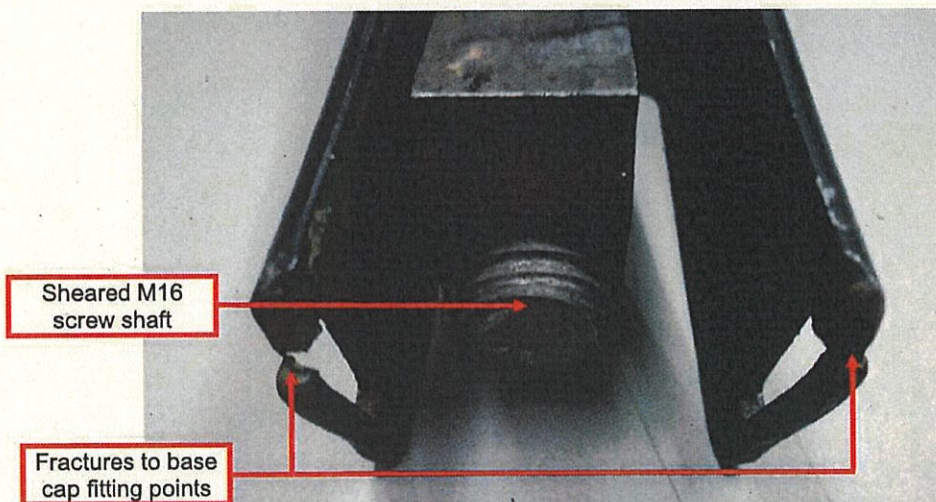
Fractures to base cap fitting points and sheared M16 screw shaft
